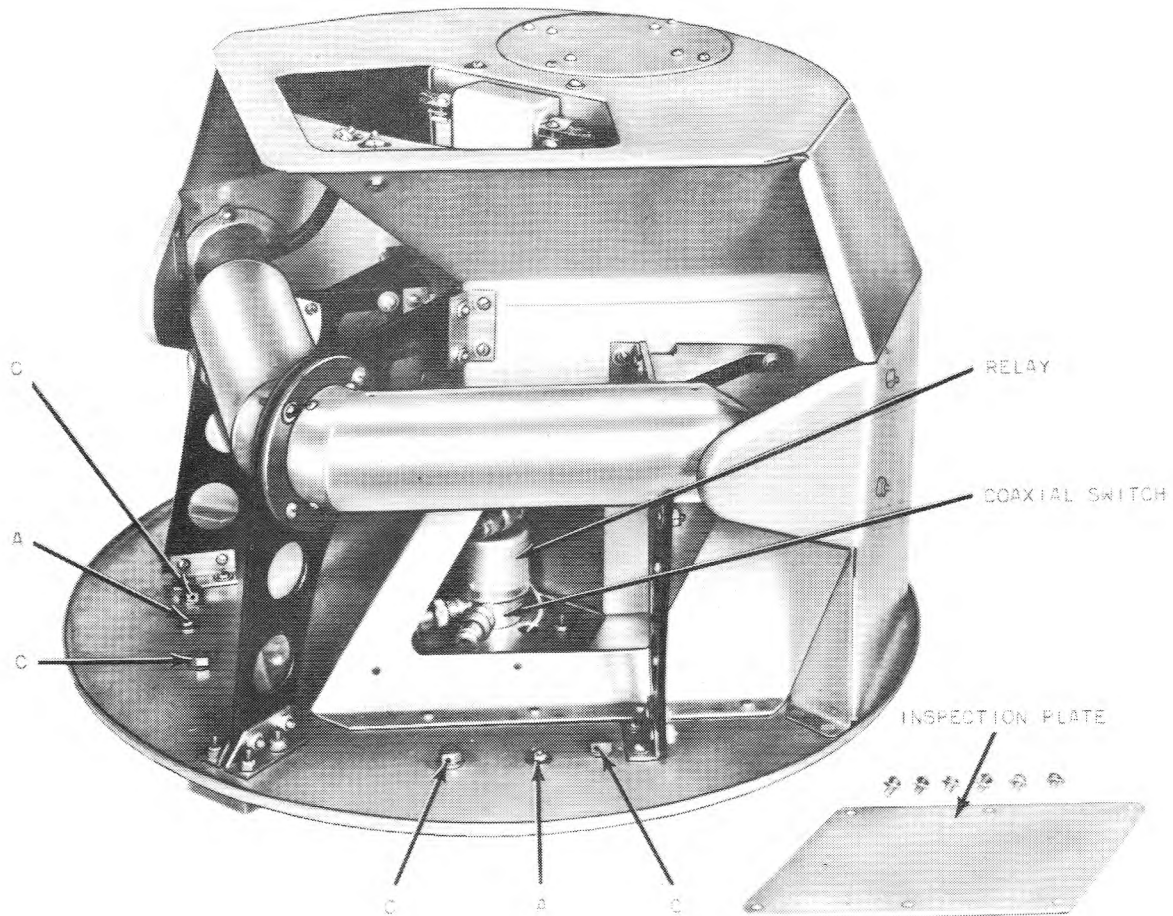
Antenna Assembly AS-655/ALA-6, Coaxial Switch Detail (Typical)
